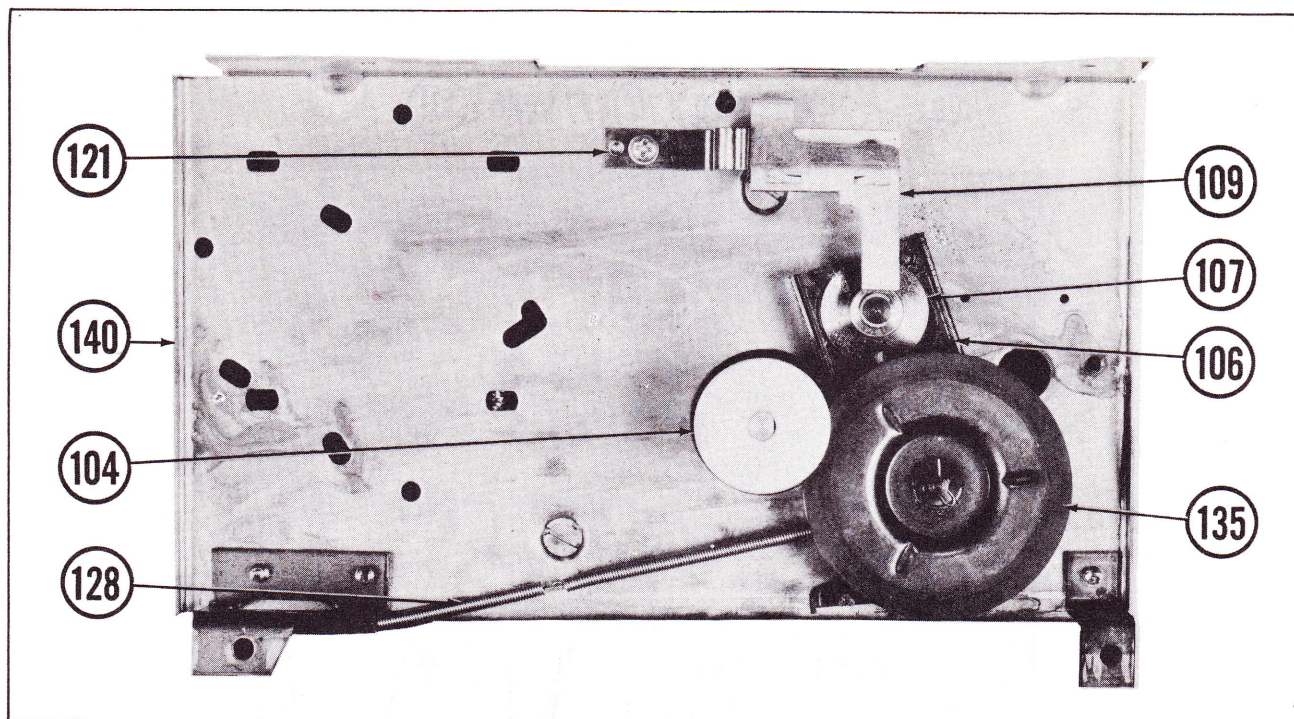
DRIVE MOUNTING PLATE ASSEMBLY
